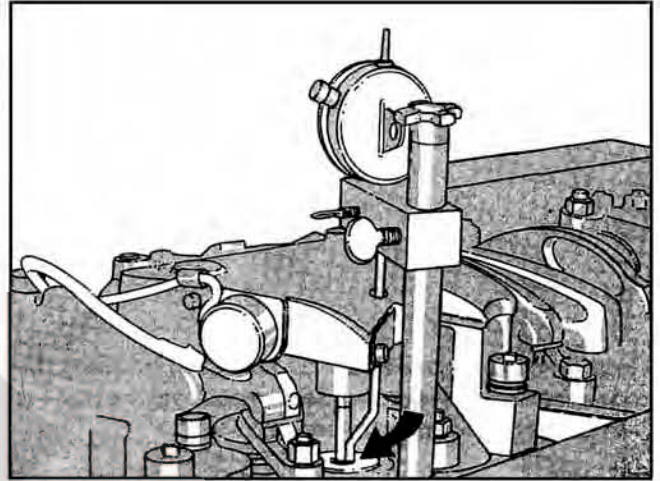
, (OM1061L). Dial indicator in place — extension in contact with plunger
